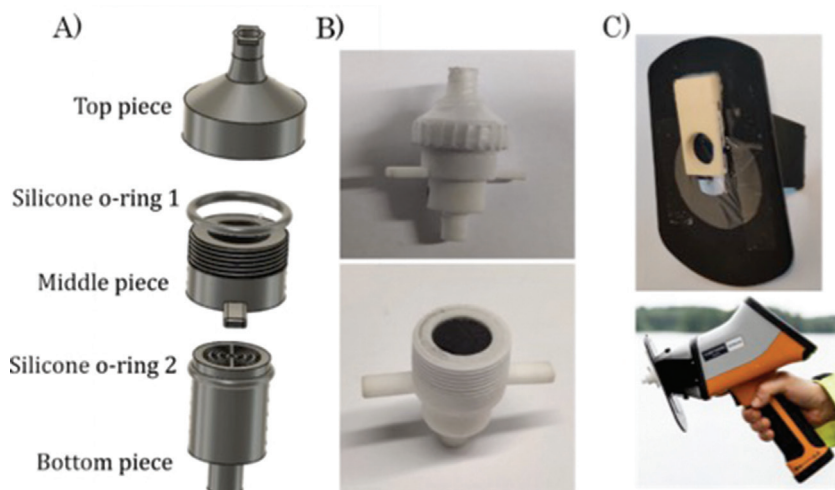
Filter holder used in the study. A) An exploded view of the design of the 3D printed parts with two additional silicone O-rings. B) Photographs of the holder. The top photograph shows the holder with all parts assembled and the bottom photograph shows the holder with top piece removed showing the surface of the filter, from which metal signals are measured with pXRF. C) Adapter used to attach the filter and holder to pXRF measurement position.
